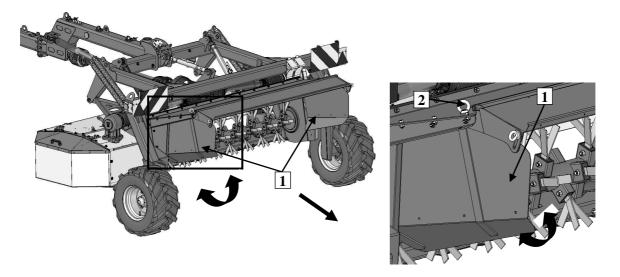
Adjusting of swath guides: 1- swath guide, 2 - adjustment bolt
